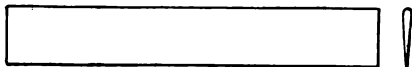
SPECIMEN PIECE FOR HARDENING.
